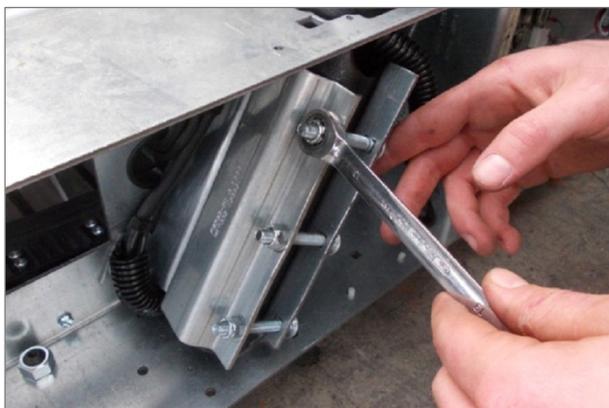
Mercury/Path Assembly, Fixing the Railing
